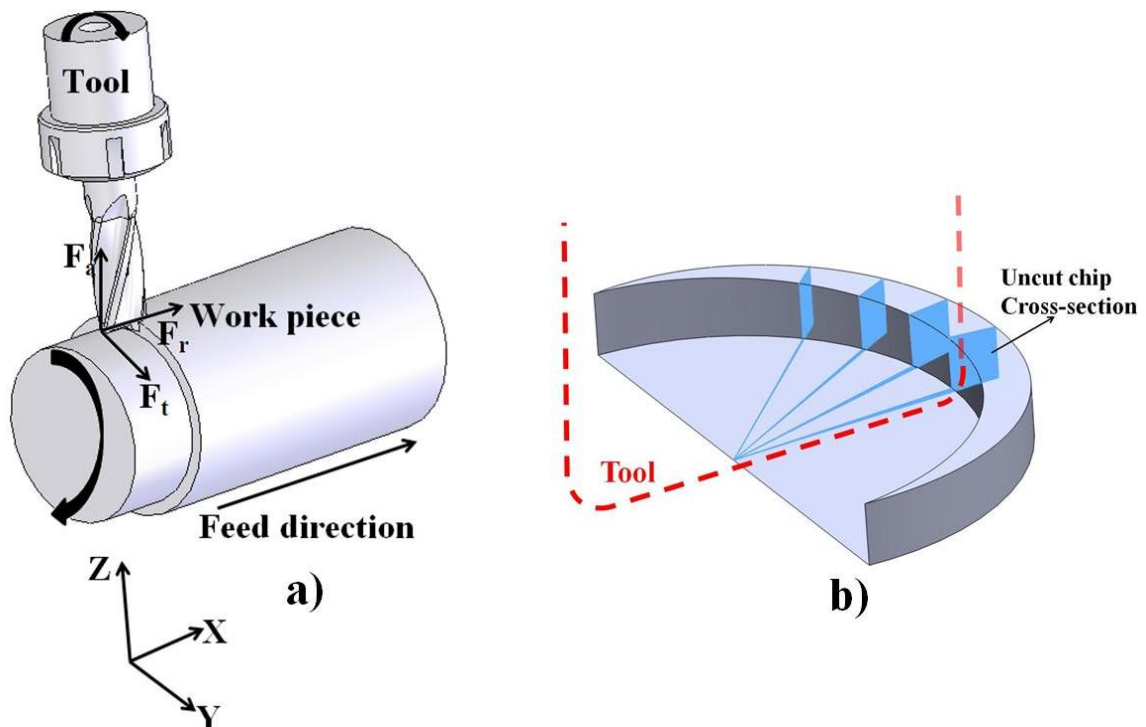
a) Tool-workpiece configuration and b) uncut chip geometry in orthogonal turn-milling
